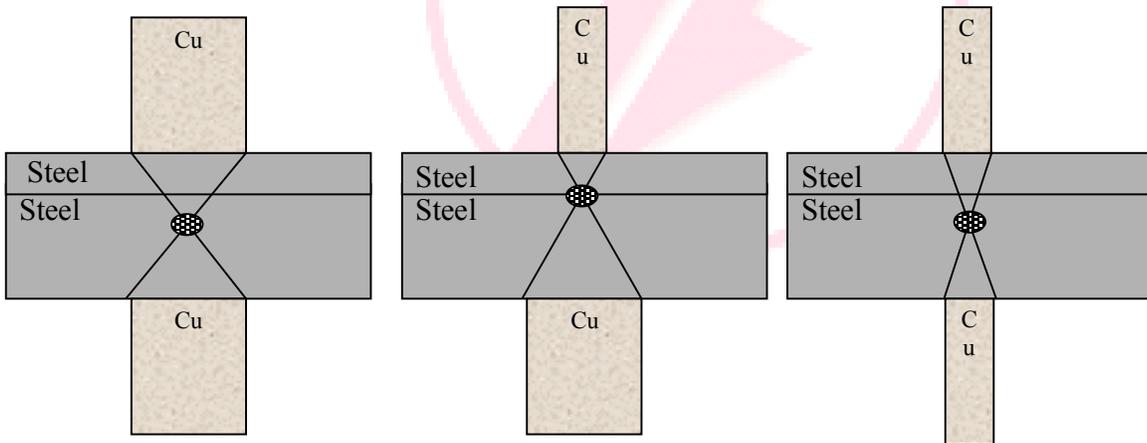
Schematic of weld stack showing effect of electrode size on heat balance. Matching electrode size to thickness of part helps to focus weld heat the weld interface.
